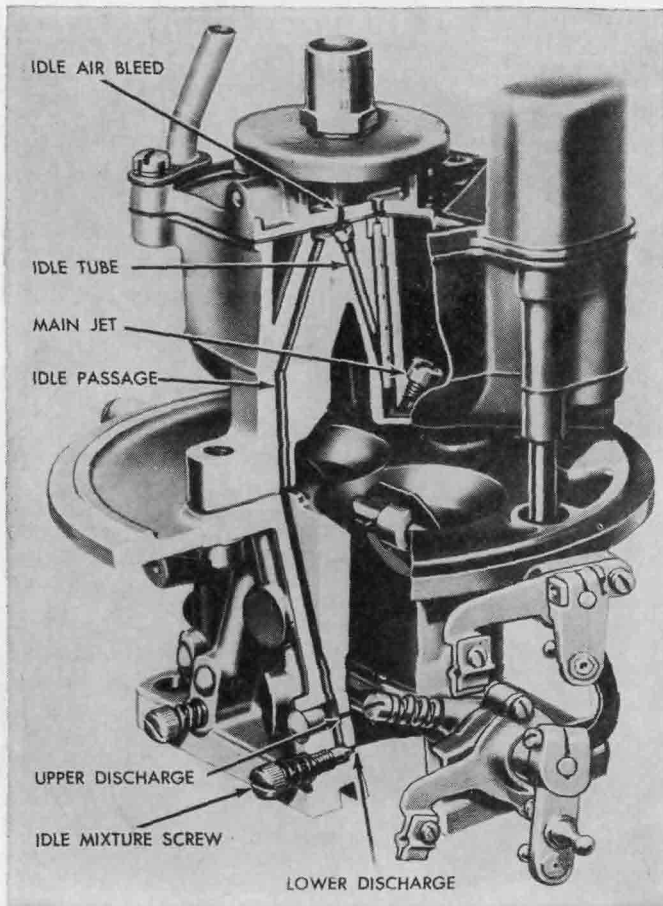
Carburetor cut away so the idle circuit can be seen. (Ford Motor Company)
